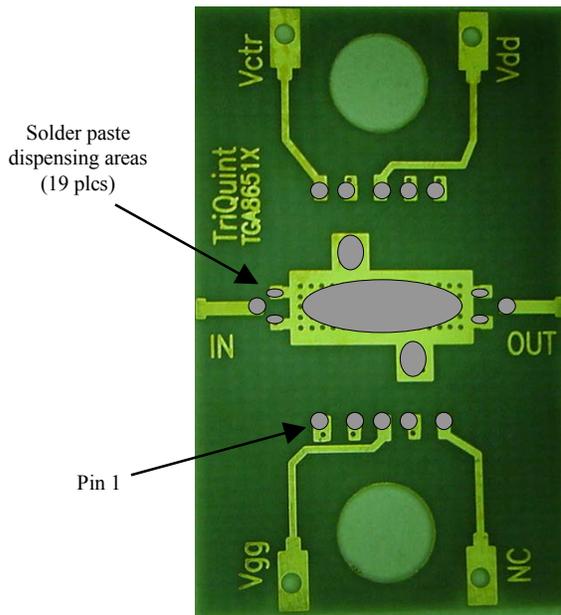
Solder paste dispensing pattern used on the evaluation board motherboard.
